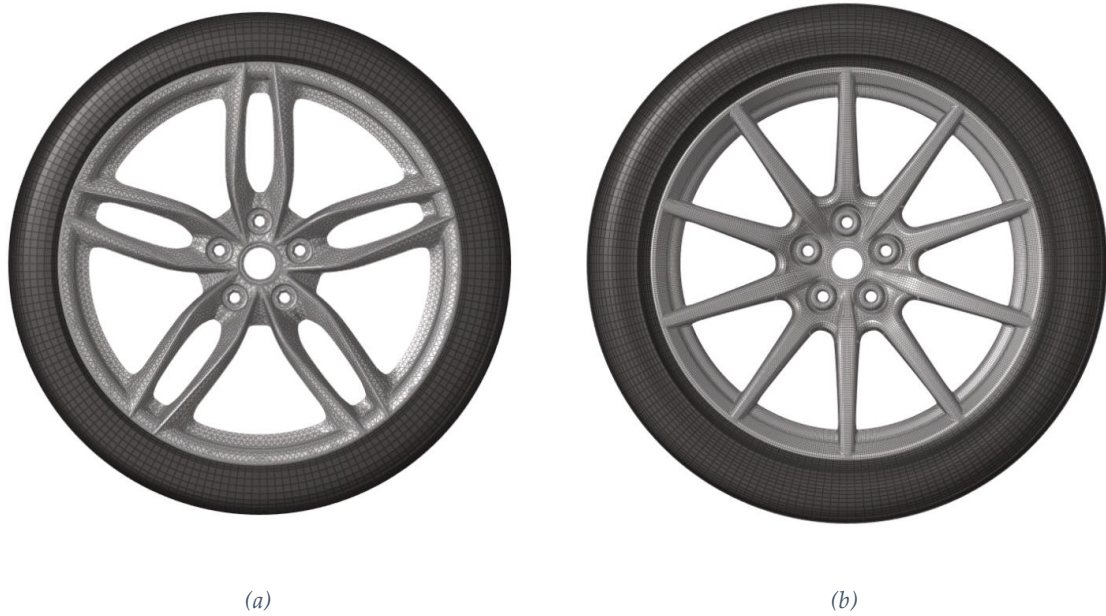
front wheel-tyre assembly of: (a) reference forged aluminium wheel; (b) composite wheel. From [60]
